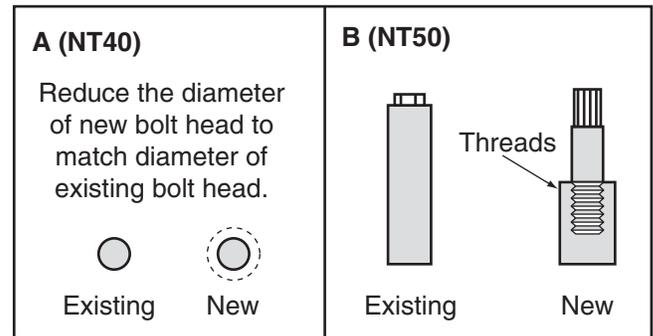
Examples of making the diameter of the new bolt head equal that of the existing bolt head (NT40 and NT50).
